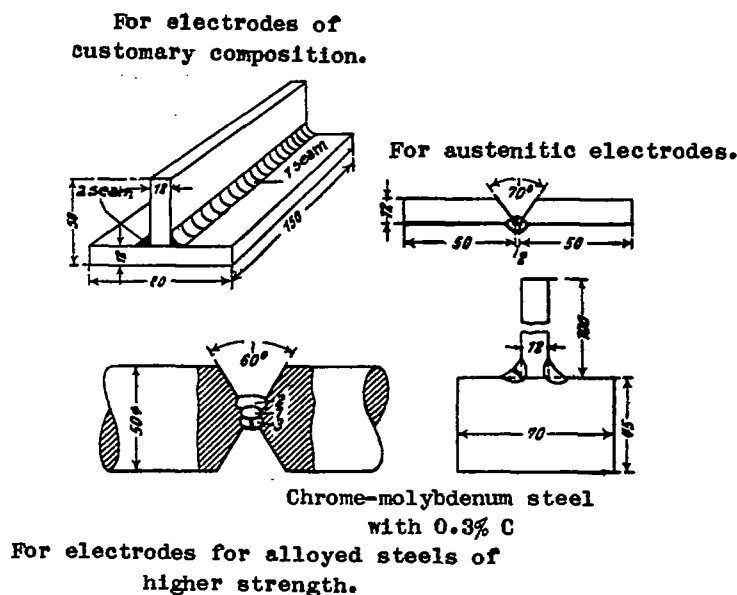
Methods for testing the susceptibility to welding seam cracking (according to Stieler).
